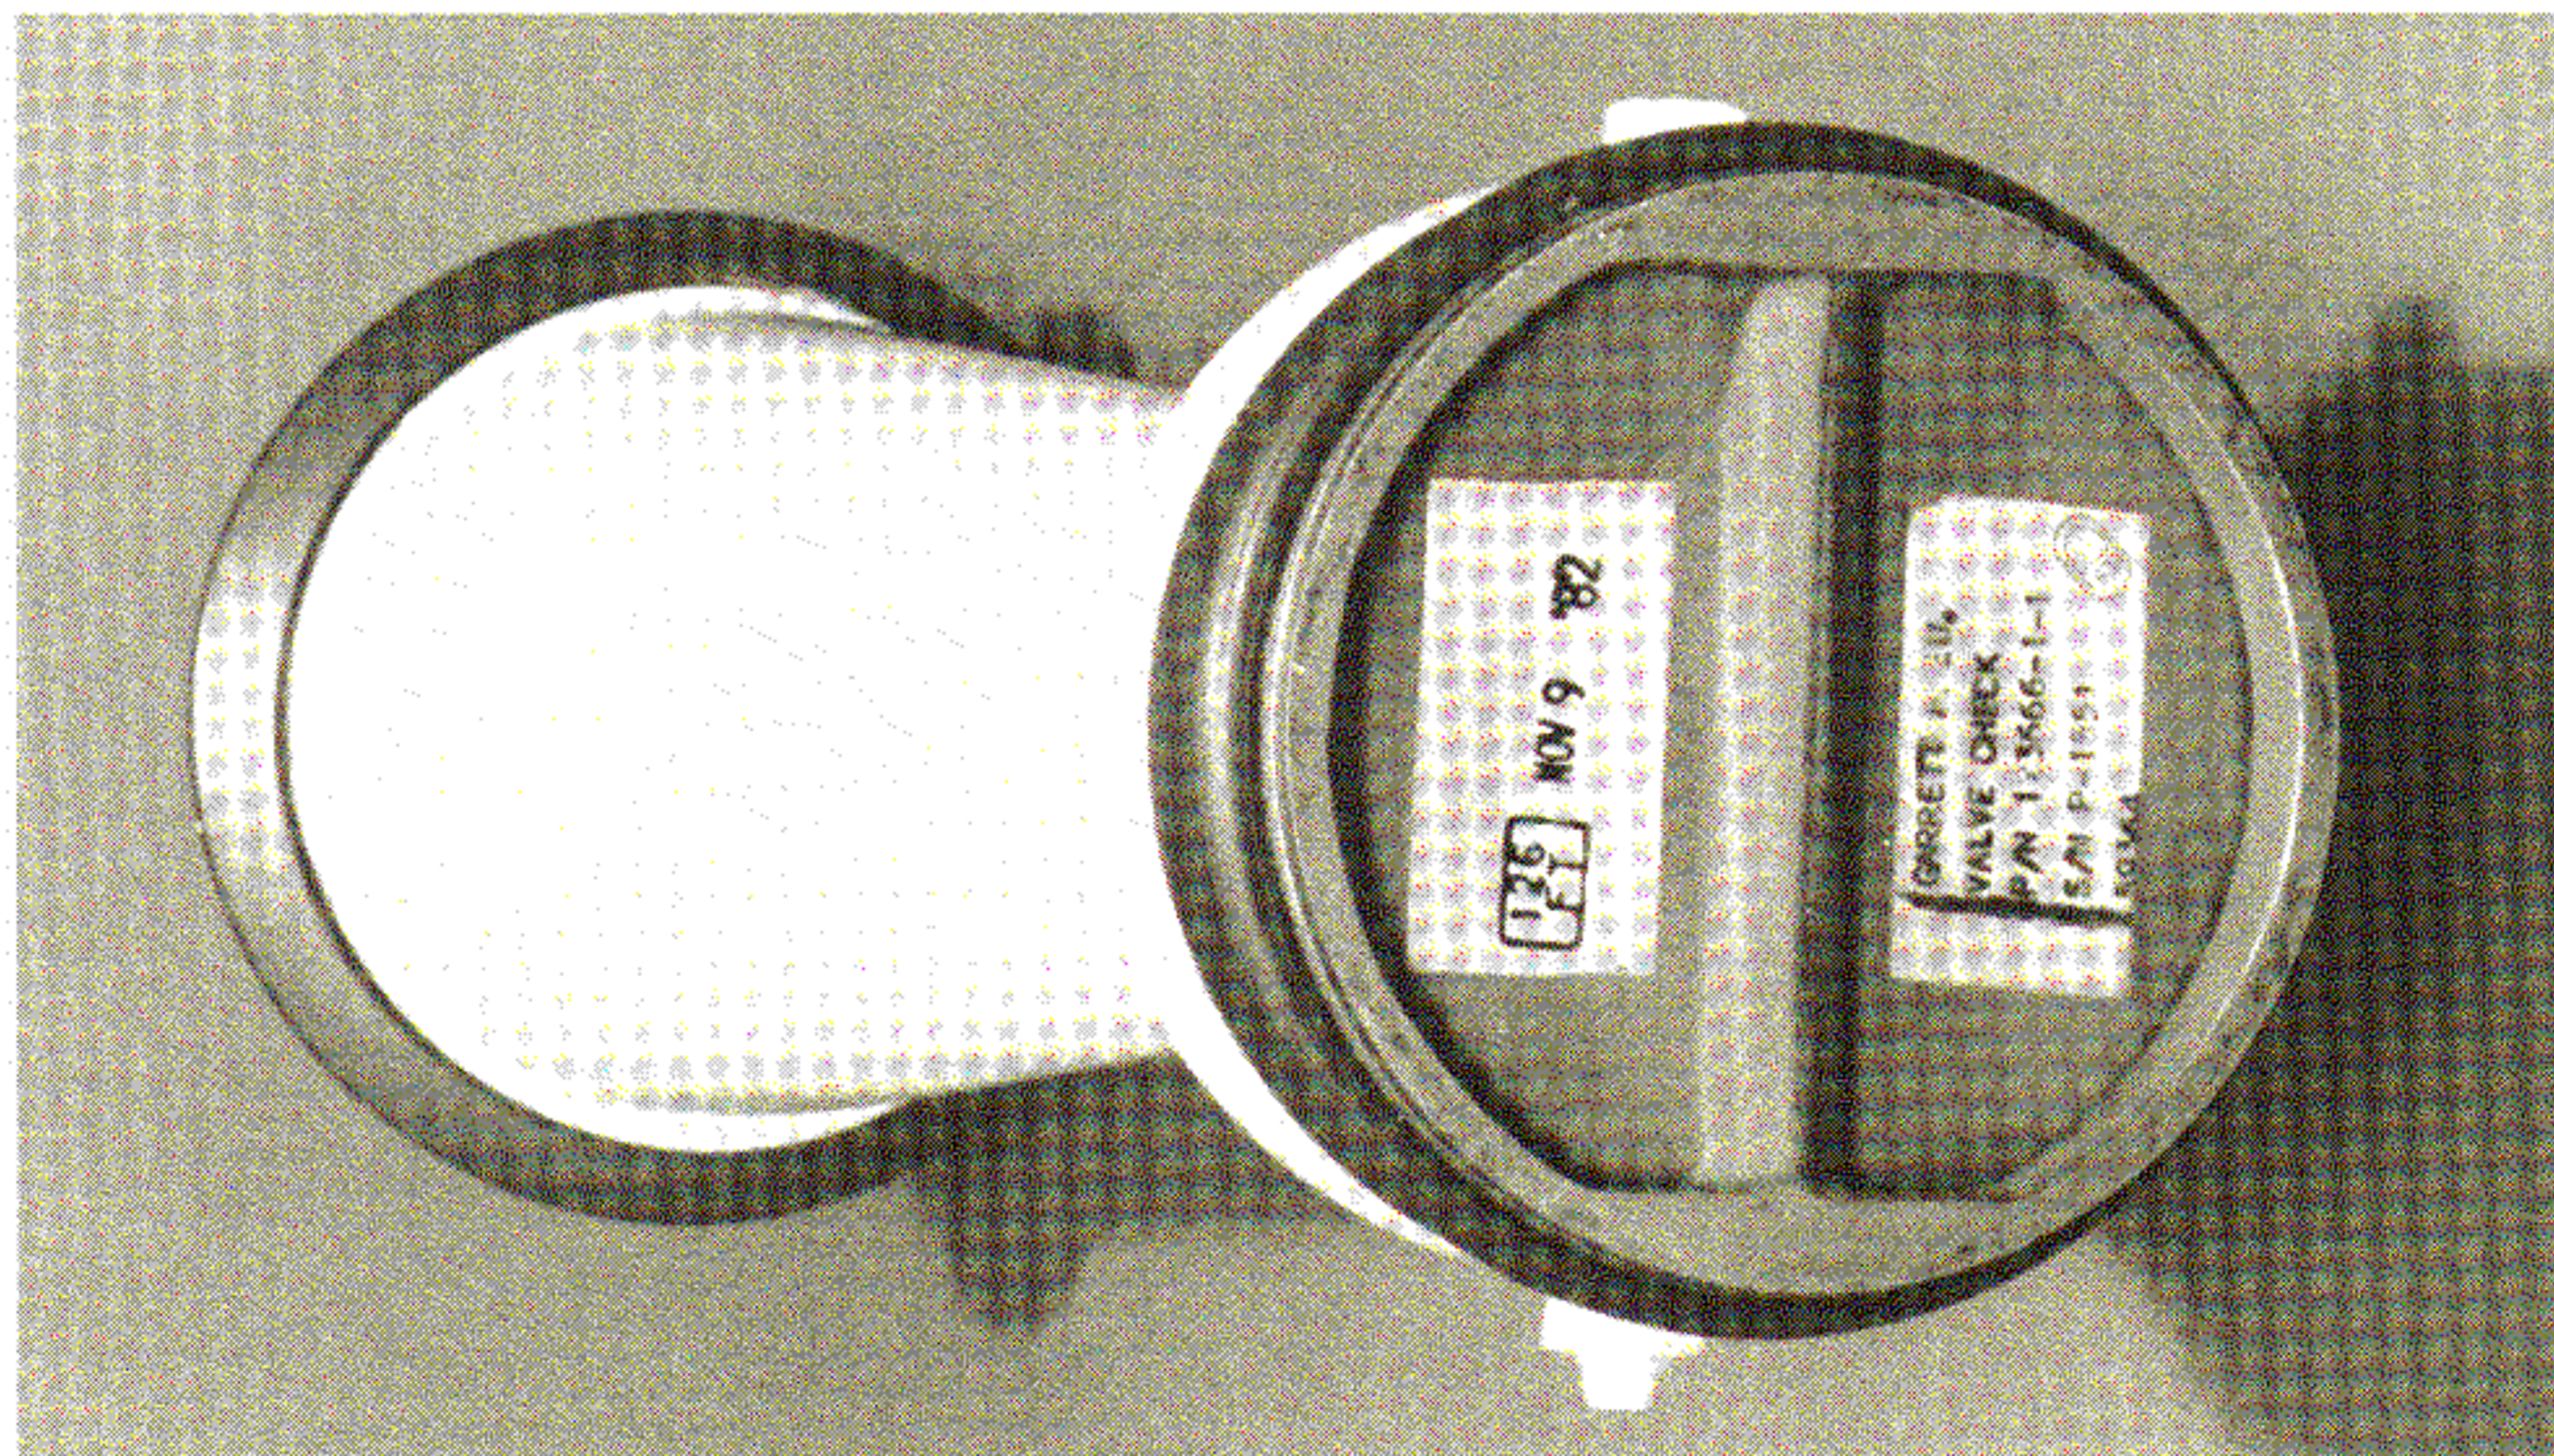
Auxiliary Power Unit/Air Multiplier Package Venturi Check Valve. Note that the valve is oriented so that the valve flapper hinge line is vertical.
